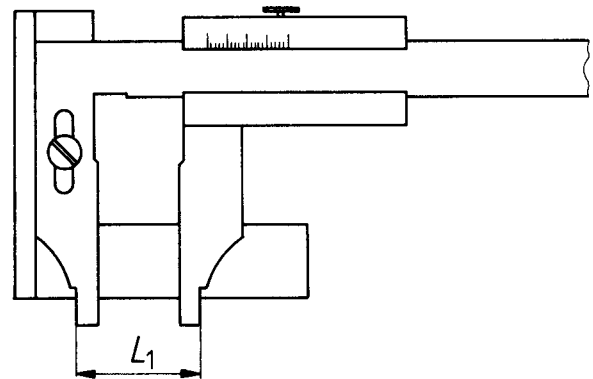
Calliper vernier for measuring dimension  $L_1$
